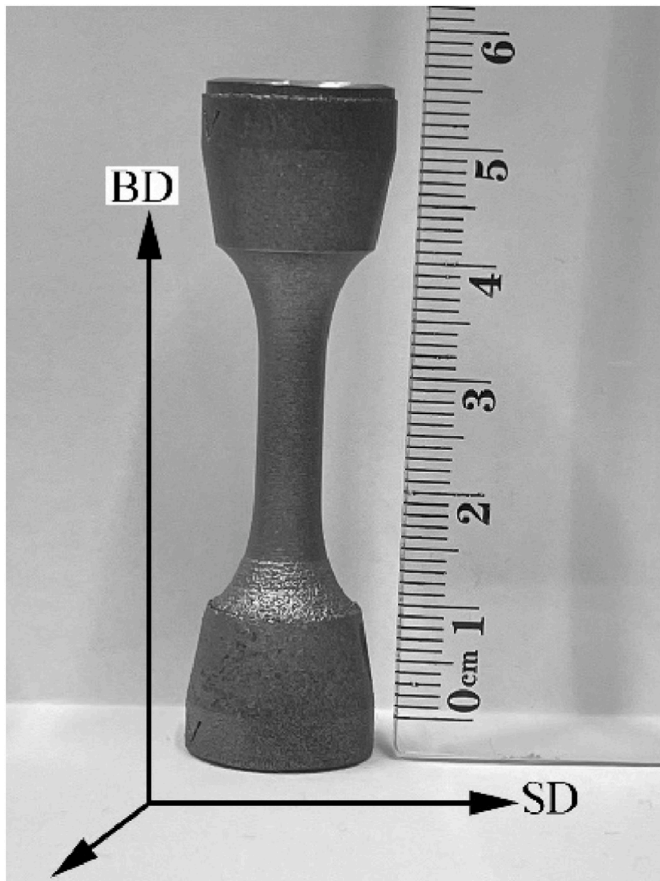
Macrograph of the fatigue test of the 316L samples printed by the L-PBF technique showing the geometry and building direction.
